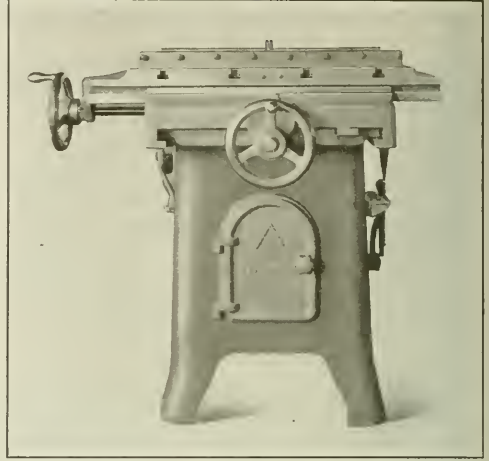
End View of Die Milling Machine which clearly shows the Construction of the Horizontal and Transverse Slides
